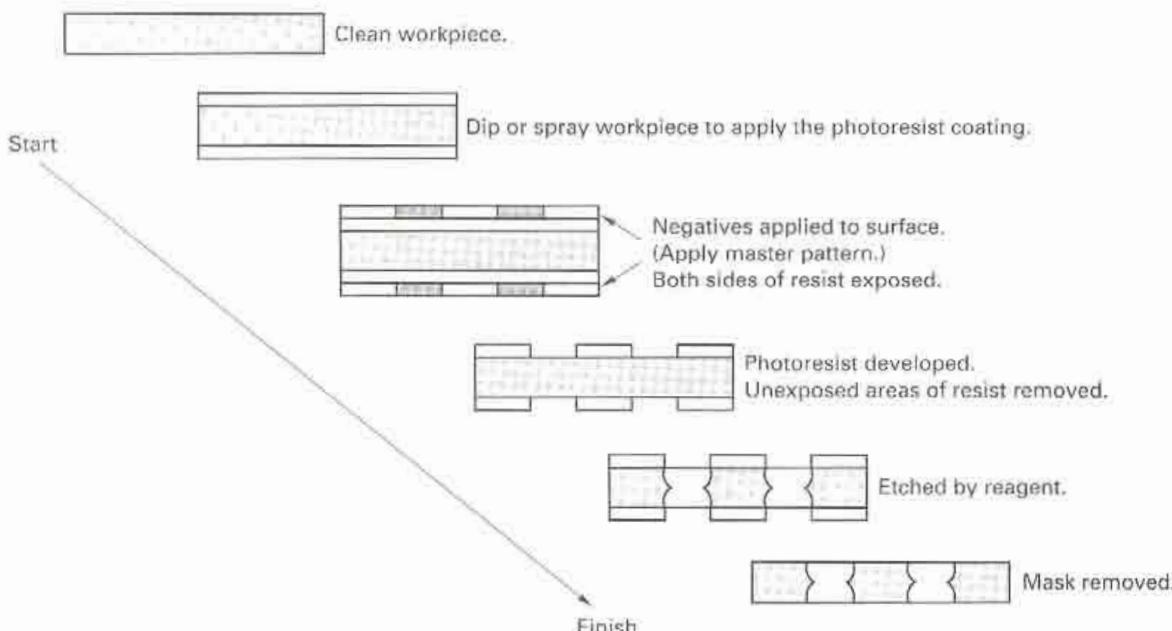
Basic steps in photochemical machining (PCM).
